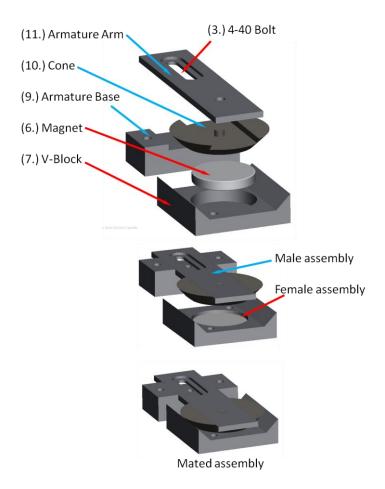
Shows (top) the exploded view of the interlocking mechanism, (middle) the separate male and female assemblies to the interlocking mechanism and (bottom) the mated assembly of the two
